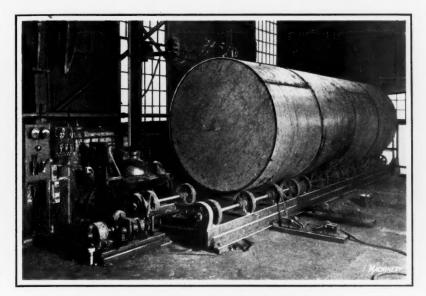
Lincoln Automatic Welder for Storage Tanks
